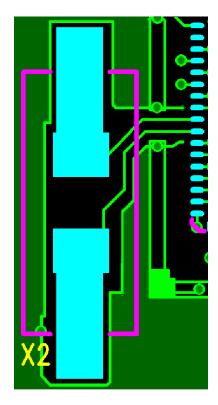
PCB Top Metal Layer Shielding of Crystal Signals
